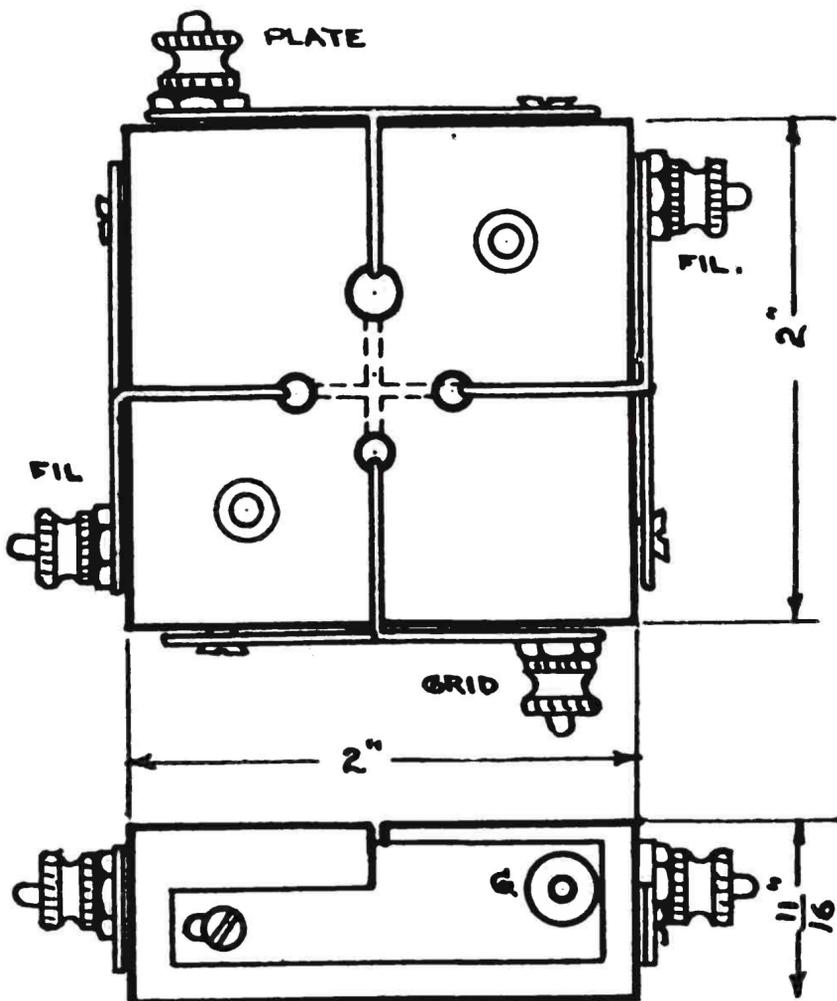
Assembly of a WD-11 socket as explained in the accompanying text. The exact dimensions are given and should be strictly followed. A neat and practical socket will result.
